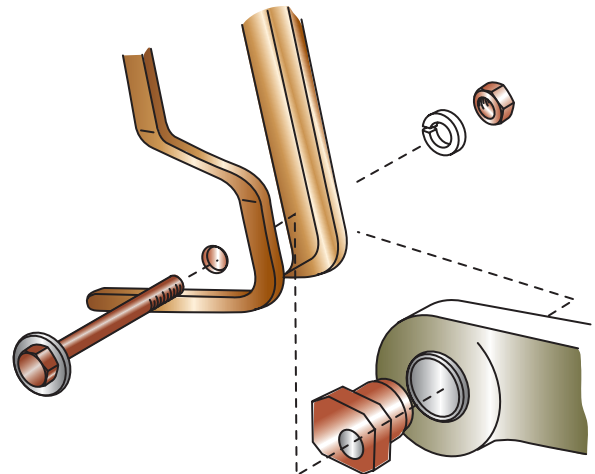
Aftermarket bushing kit to adjust rear wheel toe and camber.
